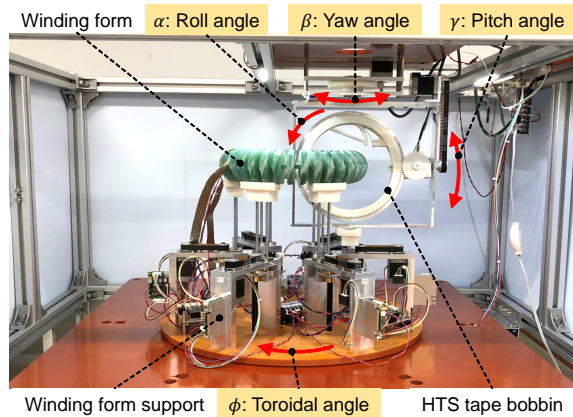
Photograph of the helical winding machine for the HTS-FBCs using REBCO tapes. The winding machine is composed of four stepping motors, a HTS tape bobbin and its frame, and winding form supports. To wind up REBCO thin tapes helically onto the winding form without degradation in critical current, this machine is controlled simultaneously according to the toroidal angle ϕ , the yaw angle β , the pitch angle γ and the roll angle α . Besides, winding form supports work to avoid interference with HTS tape bobbin.
